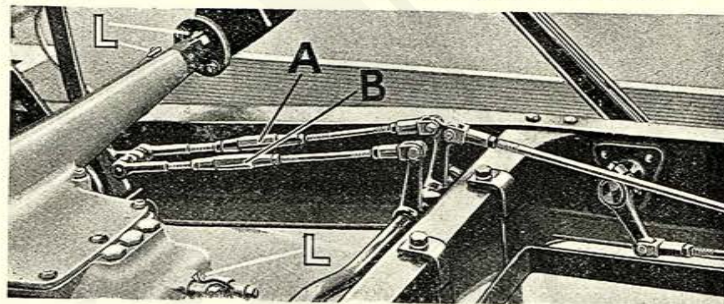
Showing adjusting nuts between Pedal and Brake Rods.
